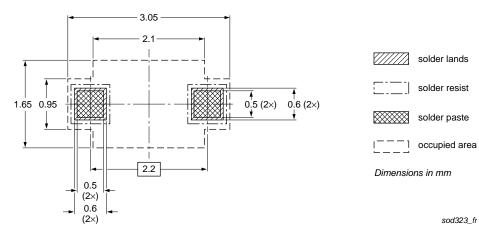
Reflow soldering footprint SOD323 (SC-76)
